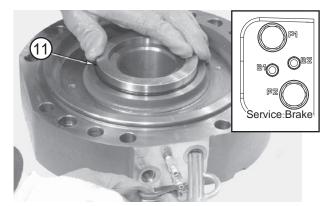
Slowly introduce low-pressure compressed air through the connection member for the service brake (P2), in order to extract the piston (11).
